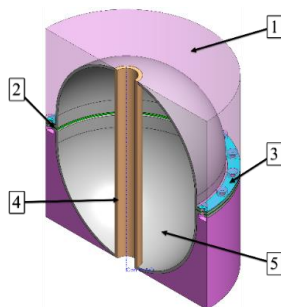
Section view of the domed displacer design, (1) foam dead volume reducer, (2) gasket, (3) plate for mounting bag seal, (4) main guide rod bar, (5) HM1189-0100 hemisphere
